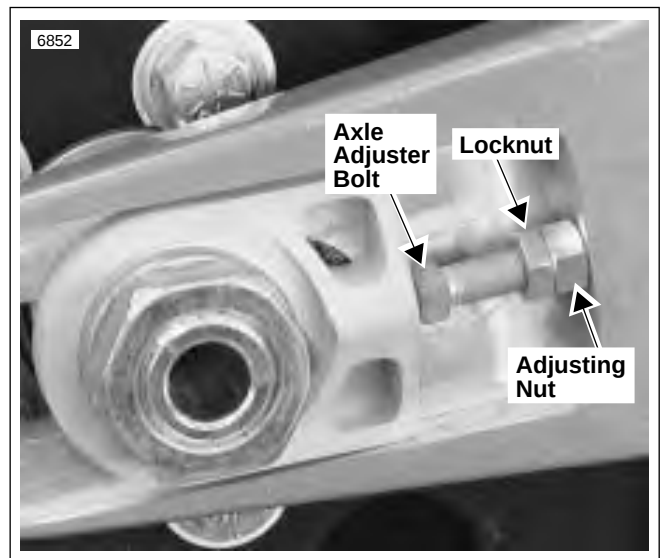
Axle Adjuster Bolt, Right Side Shown
